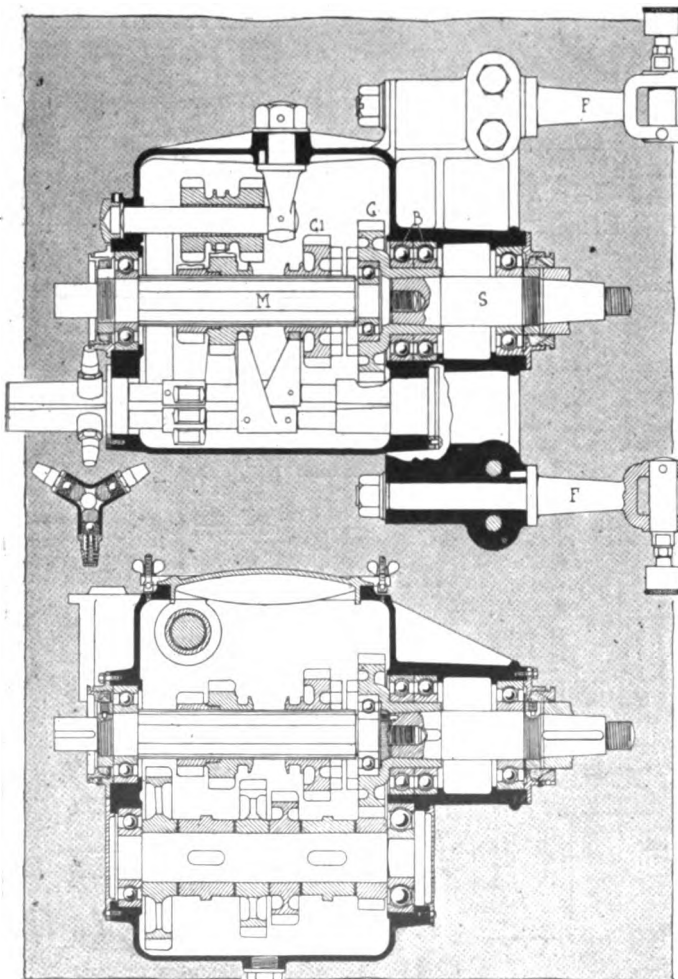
Sectional plan and elevation of the Fiat gearset, showing the arrangement of the shifter dogs and the mounting of the shafts on single and double ball bearings. The mainshaft extends practically throughout the length of the case
